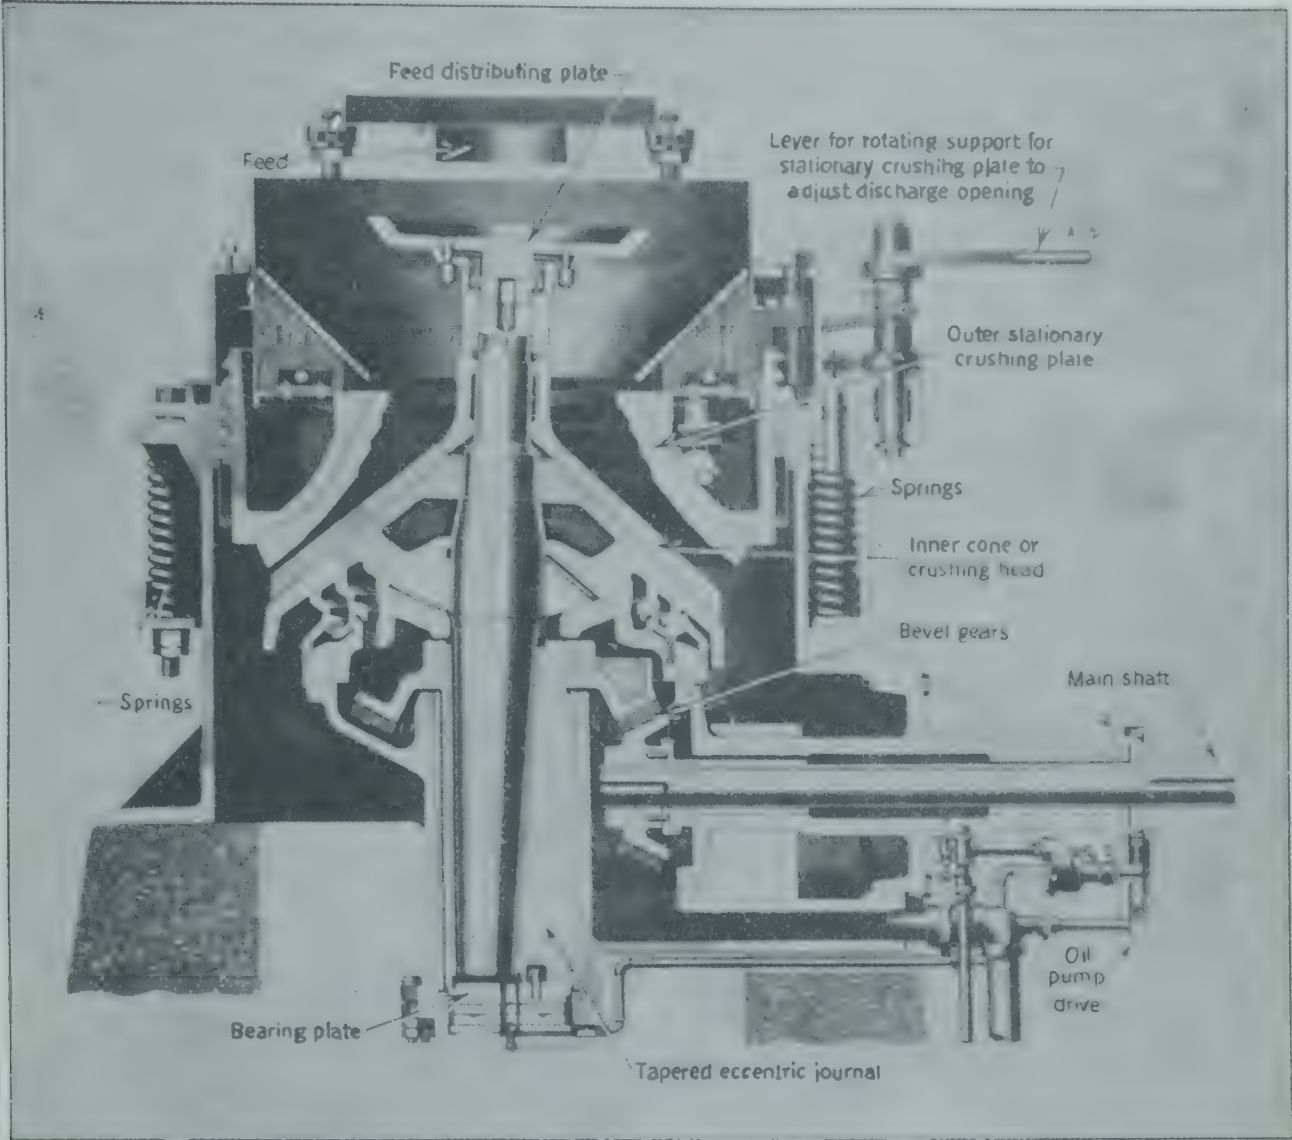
Sectional drawing of cone crusher. (Nordberg Mfg. Co.)
